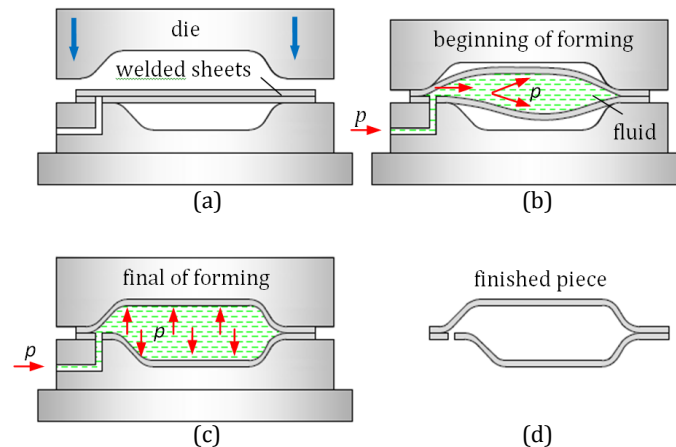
Scheme of welded sheet hydroforming process
